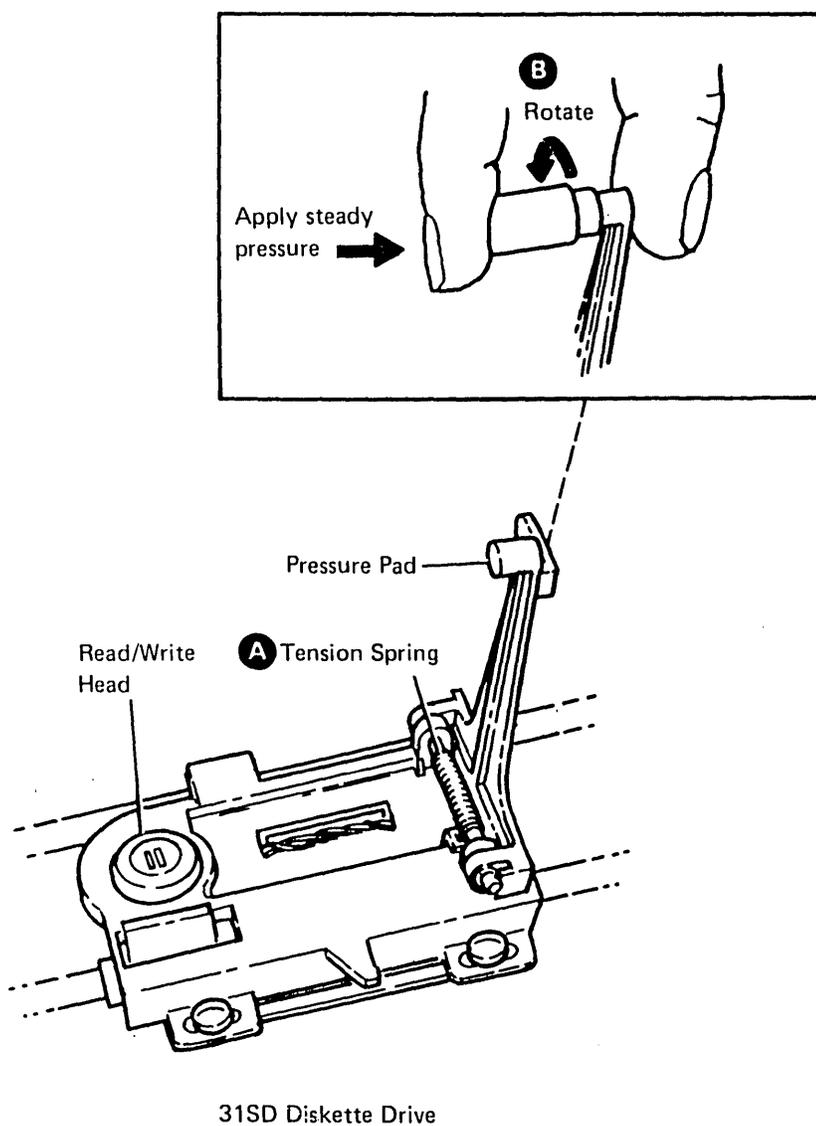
Head/Carriage Pressure Pad Removal and Replacement
